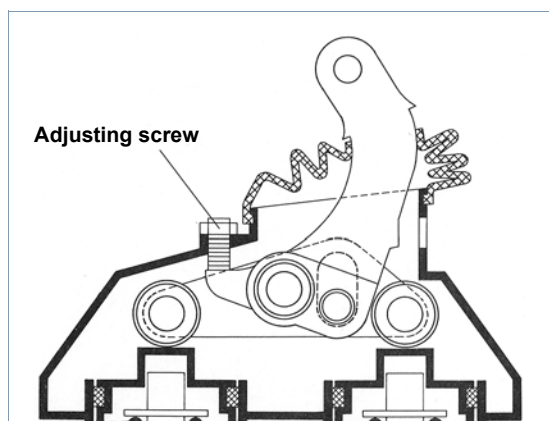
Brake valve 461 499 - Cross-section, Position of the adjusting screw
